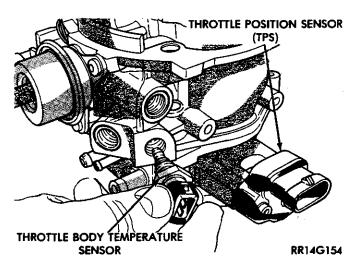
Throttle Body Temperature Sensor—5.2L and 5.9L Engines
